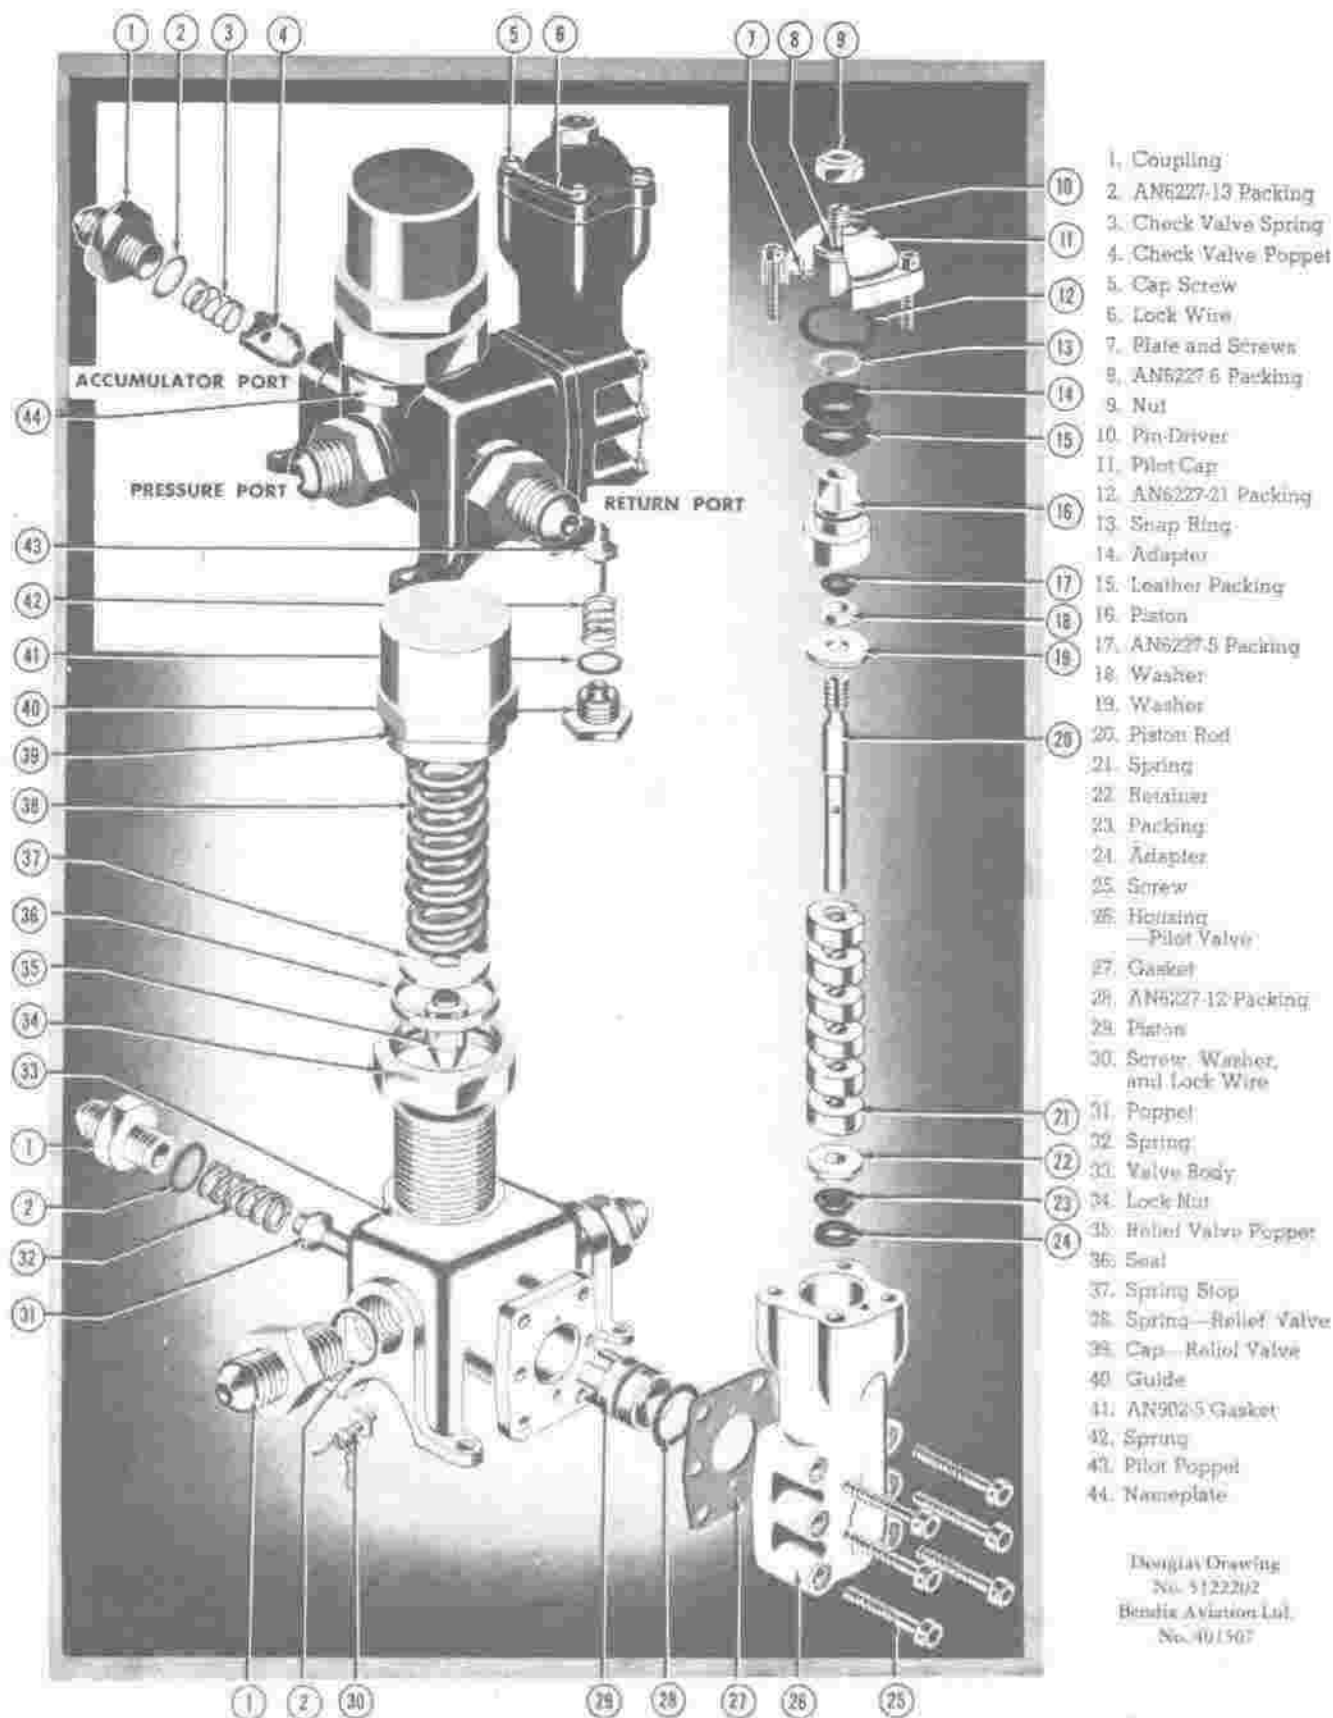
Hydraulic System Pressure Regulator and Relief Valve
